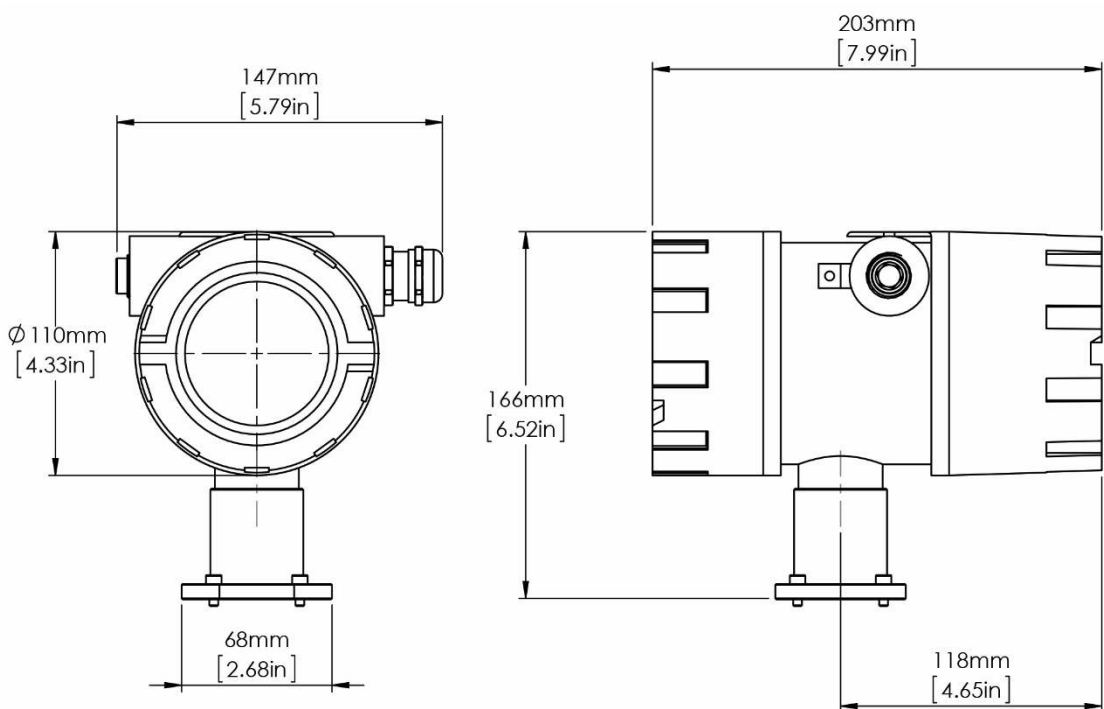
Dimensional Drawing: TCE 8000 Compact
